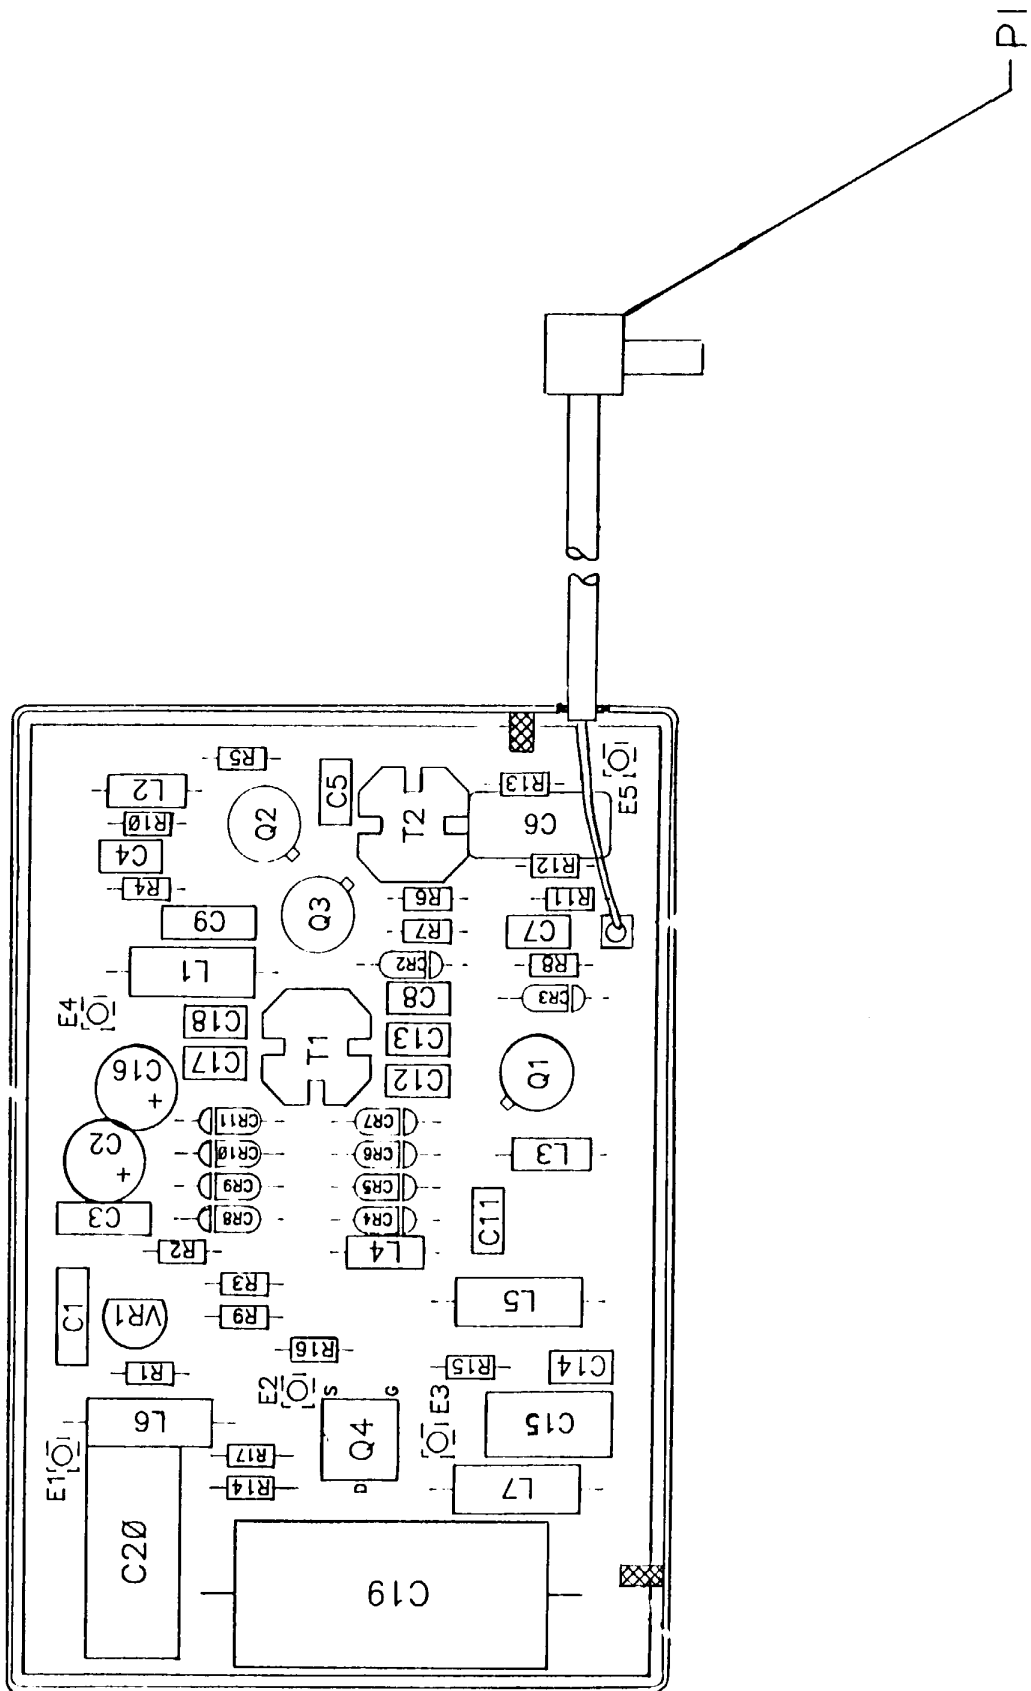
VCO PWB Assembly A10A1 Component Locations (10215-4120)
